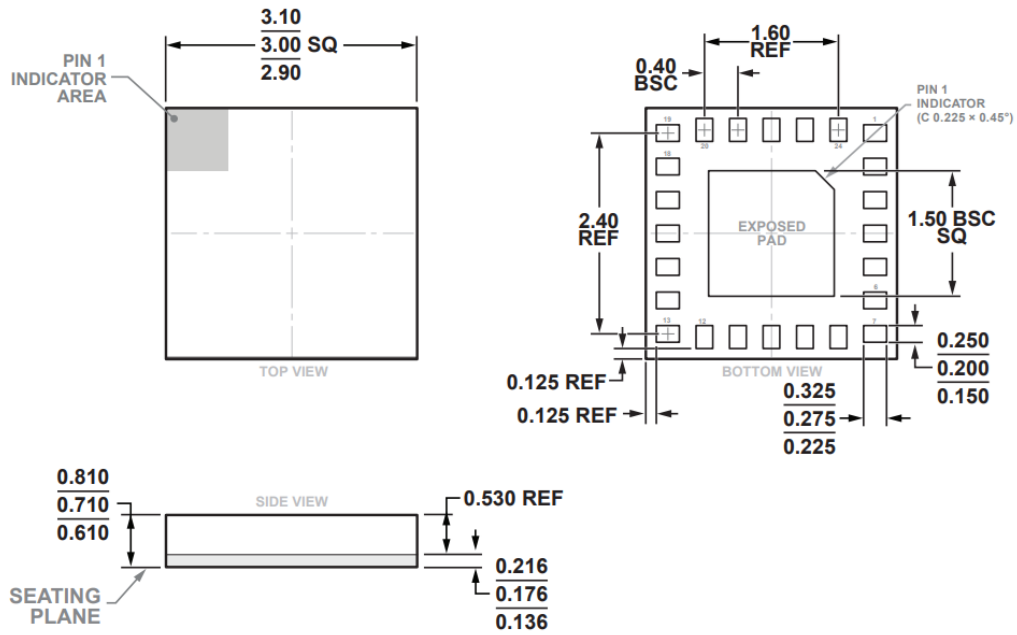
24-Terminal LGA 3 mm x 3 mm (CC-24-19) Dimensions shown in millimeters
